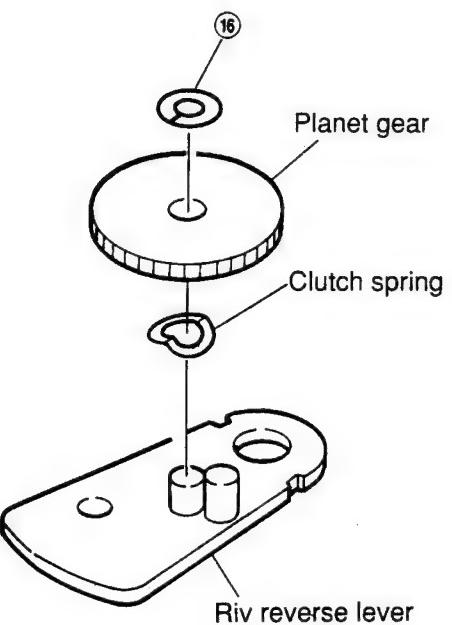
(f-5) Replacement of the clutch lever assembly and eject idler gear
